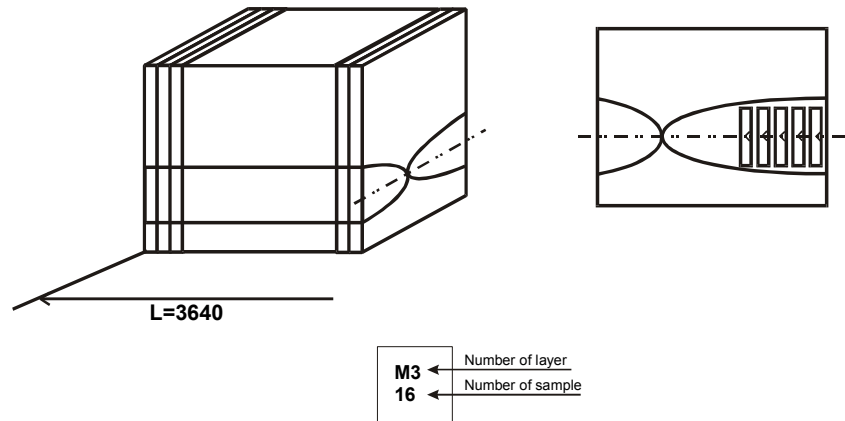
Scheme for cutting layers of weld metal from templates.
